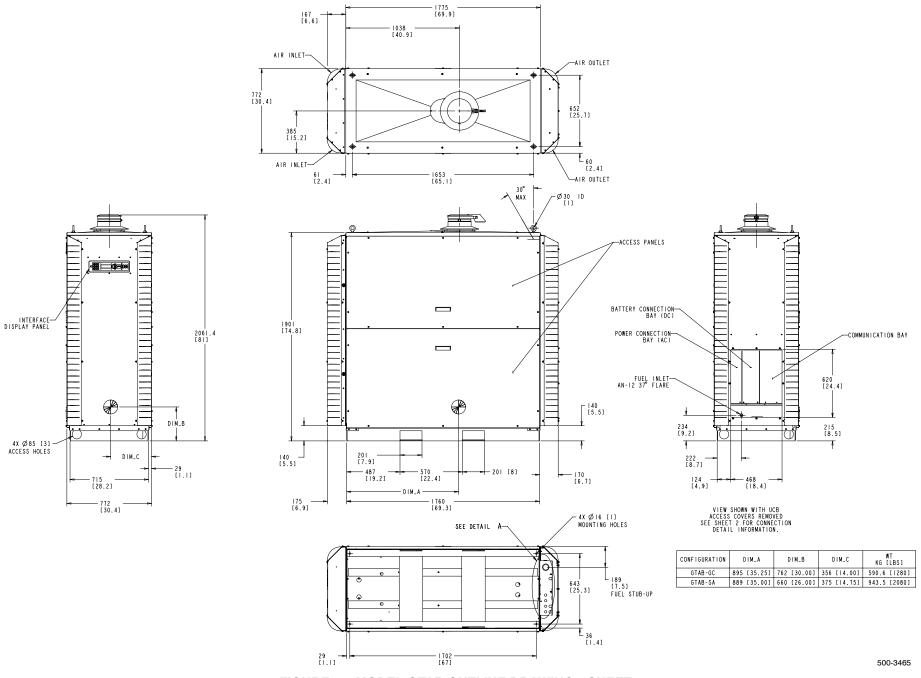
MODEL GTAB OUTLINE DRAWING—SHEET 1
